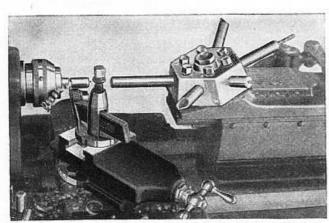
Manufacturing Small Parts Using Turret and Draw-in Chuck Fitted to 9-inch Lathe
